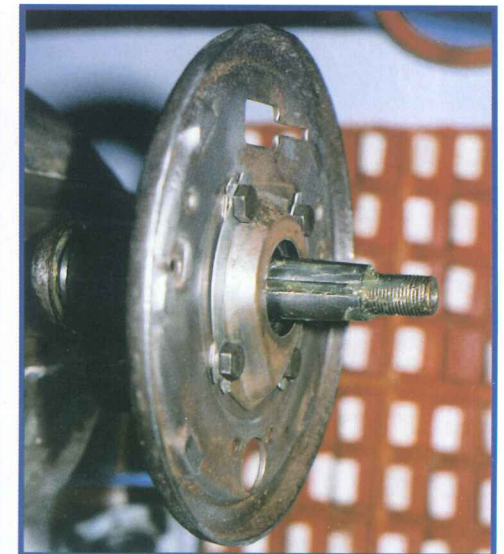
Smear the paper gasket with grease and reassemble with the oil seal, back plate, grease trap and tab washers to the bearing housing. Remember to fit the back plate such that the wheel cylinder cut-out is at the top and also the grease trap taper faces downwards. Don't fully tighten the four bolts just yet, wait until Fig 15.
